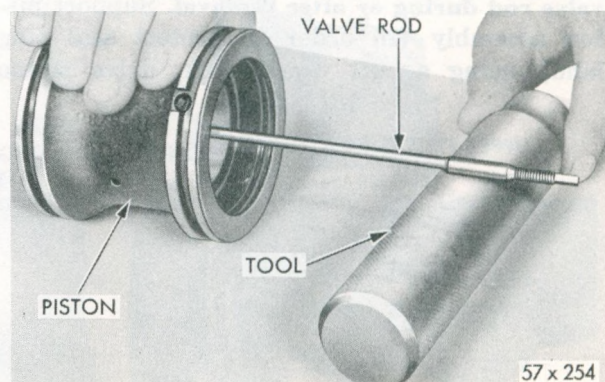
Checking the Valve Rod for Trueness (Tool C-3333)
